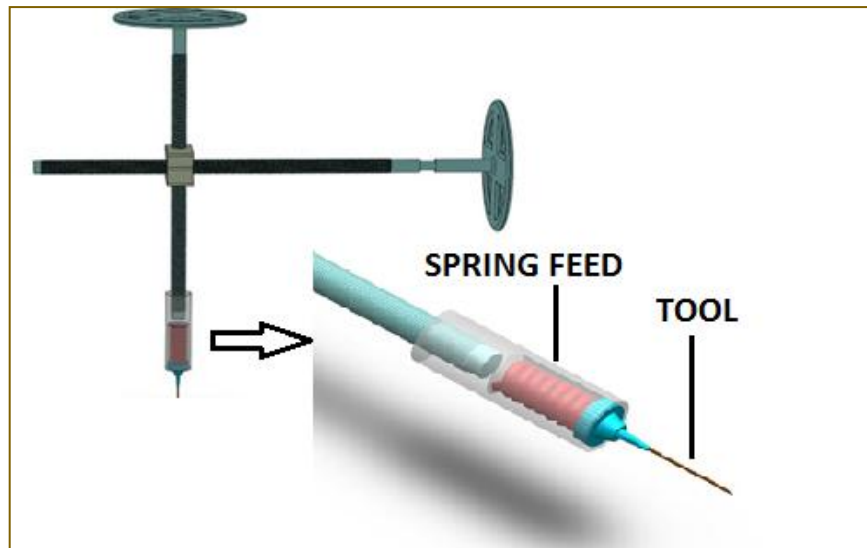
3D CAD drawing of tool holding unit with μ -tool
